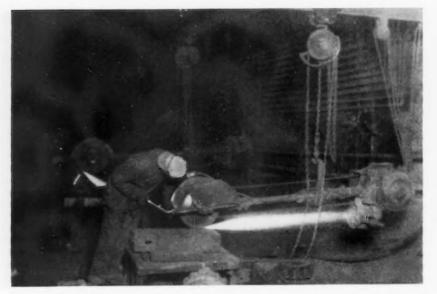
FIG. I—The first grinding operation is the removal of surface irregularities by means of swing frame grinders, such as shown above, or by portable grinders in the case of very large castings.
